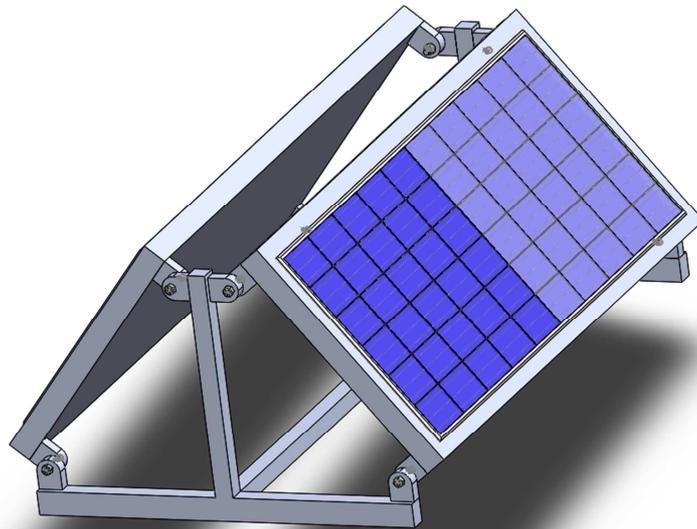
Initial planar mounting design. This is the design chosen that was later improved.
